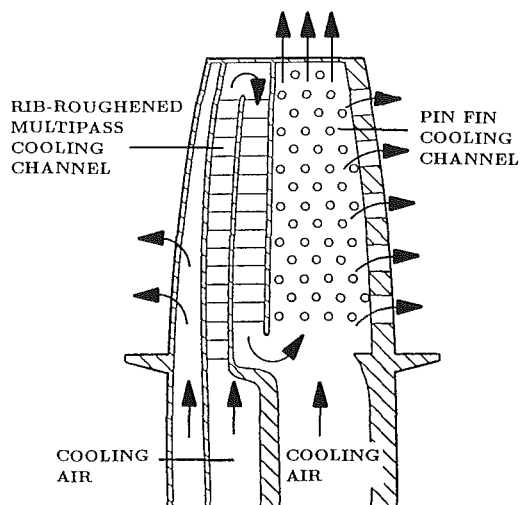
Cutaway view of a typical modern internally cooled turbine blade
